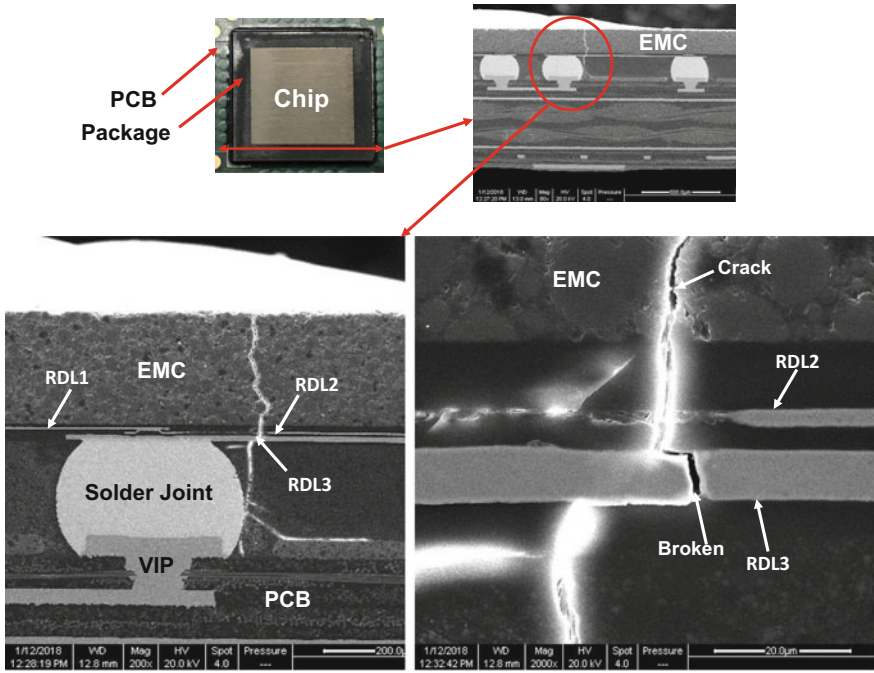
PCB assembly for failure analysis (after 550 drops). Failure modes showing RDLs broken and EMC cracking
